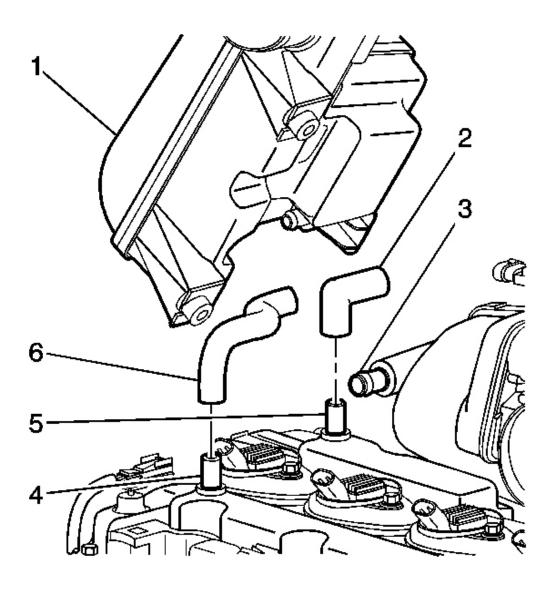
View Of Crankcase Ventilation System Courtesy of GENERAL MOTORS CORP.
